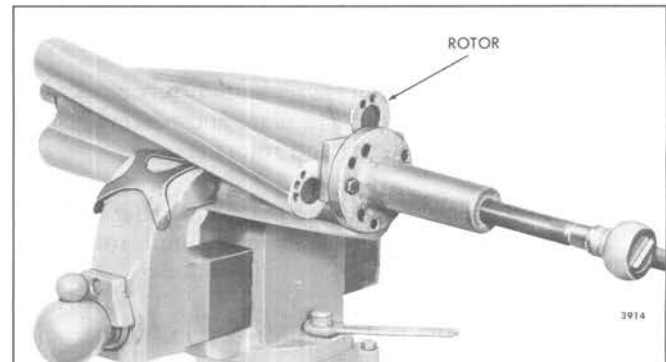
Removing Oil Seal Ring Carrier from Blower Rotor Shaft (Turbocharged Engine Blowers) using Tools J 6270-2 and J 6270-31
